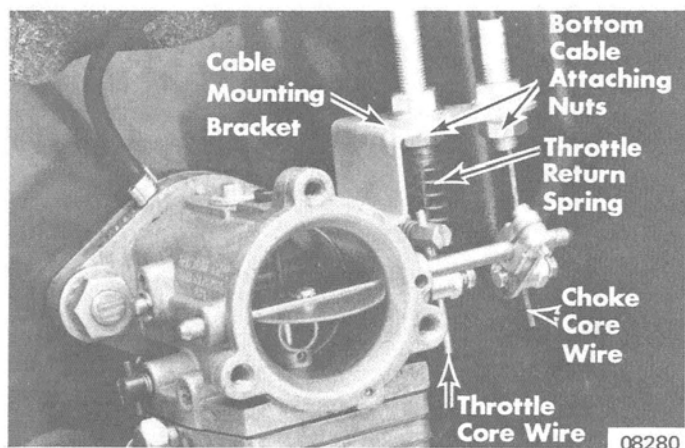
A. Cables to Carburetor (Chassis Serial No. 3709838 and Above)
